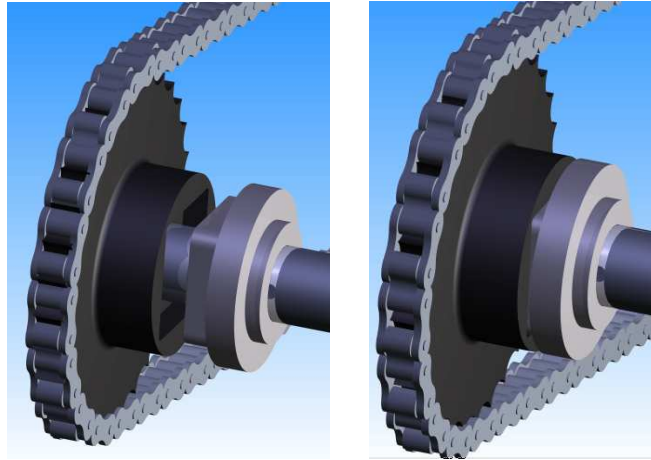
Quick-Connect Coupler disengaged (left) and engaged (right)
